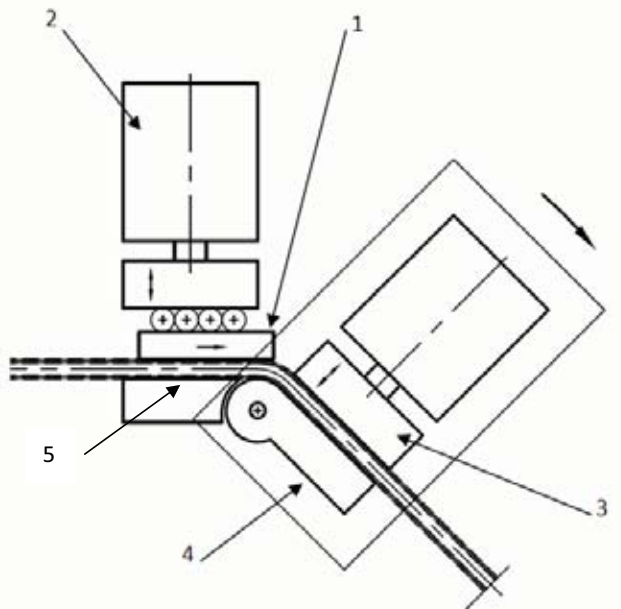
Scheme of the bending device; 1- upper holder of the feeding head, 2 - lower holder of the feeding head, 3 - upper holder of the bending head, 4 - lower holder of the bending head integrated with rotational die, 5 - pressure force actuator
